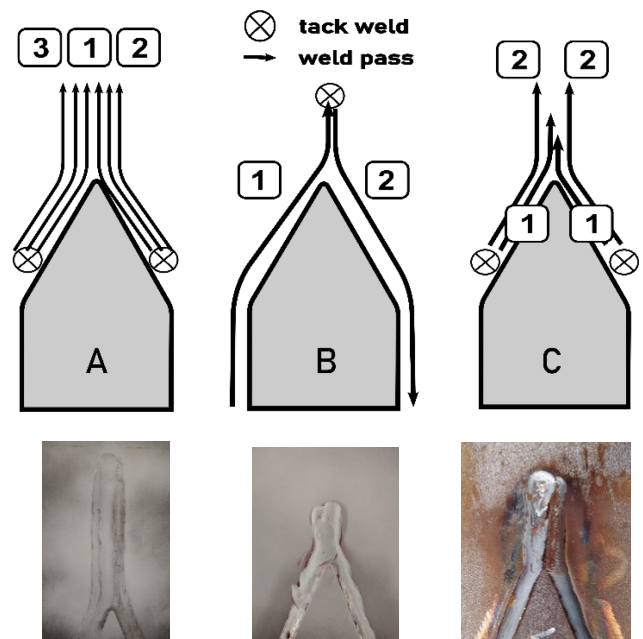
The different welding sequences used in these investigations and examples of the extended weld seams for each weld sequence.
